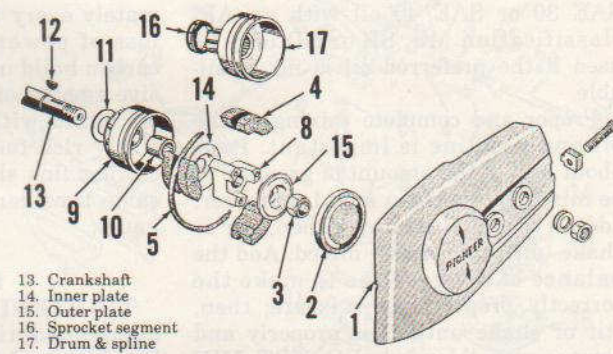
Exploded view of clutch used on late models. Clutch is also service replacement for early models. Some saws may be equipped with floating sprocket (16).
